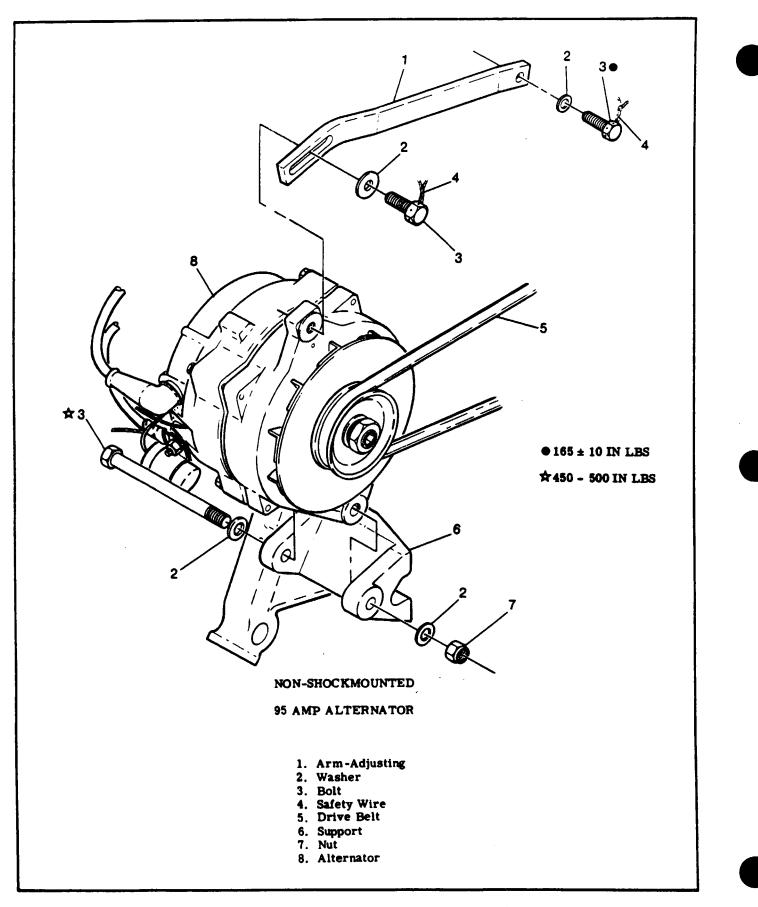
Alternator Installation (Sheet 2 of 2)
